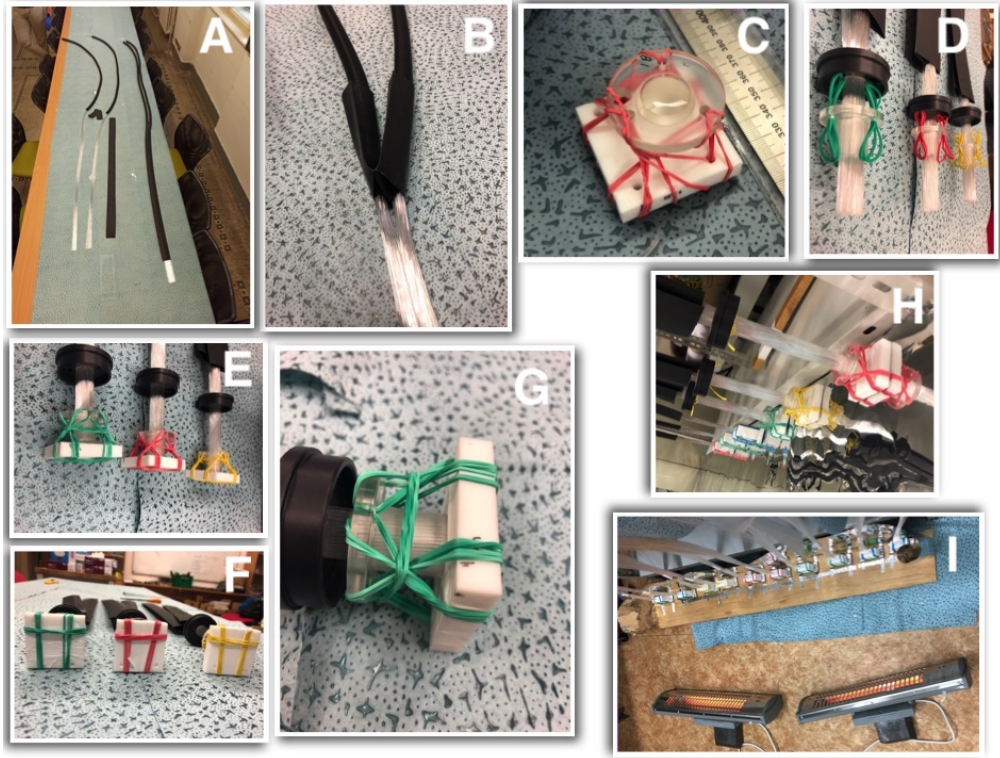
Pictures of the circular connectors making: preparation for the shaping process (A) and (B), testing of the tightness (C), preparation for attaching of the mould (D), attaching of the mould (E) and (F), detail of the securing (G), demonstration of the positioning during the gluing process (H) and (I).
